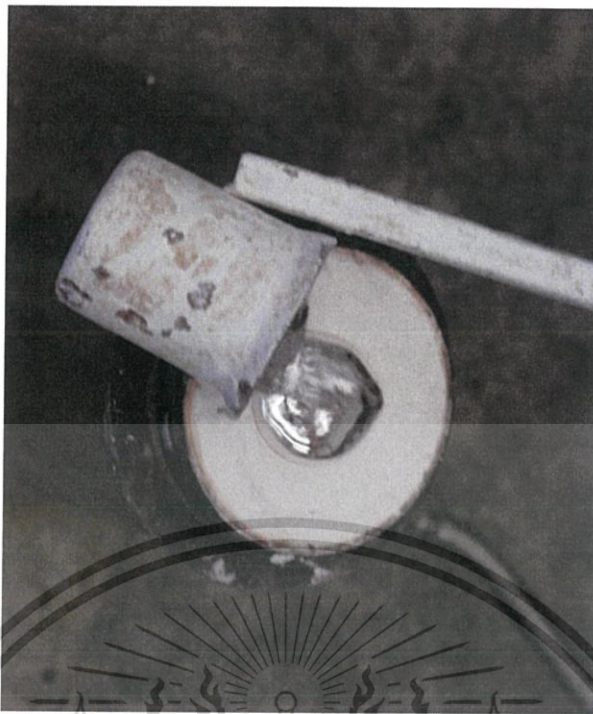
A foamed plaster mold during casting of molten aluminium alloy
